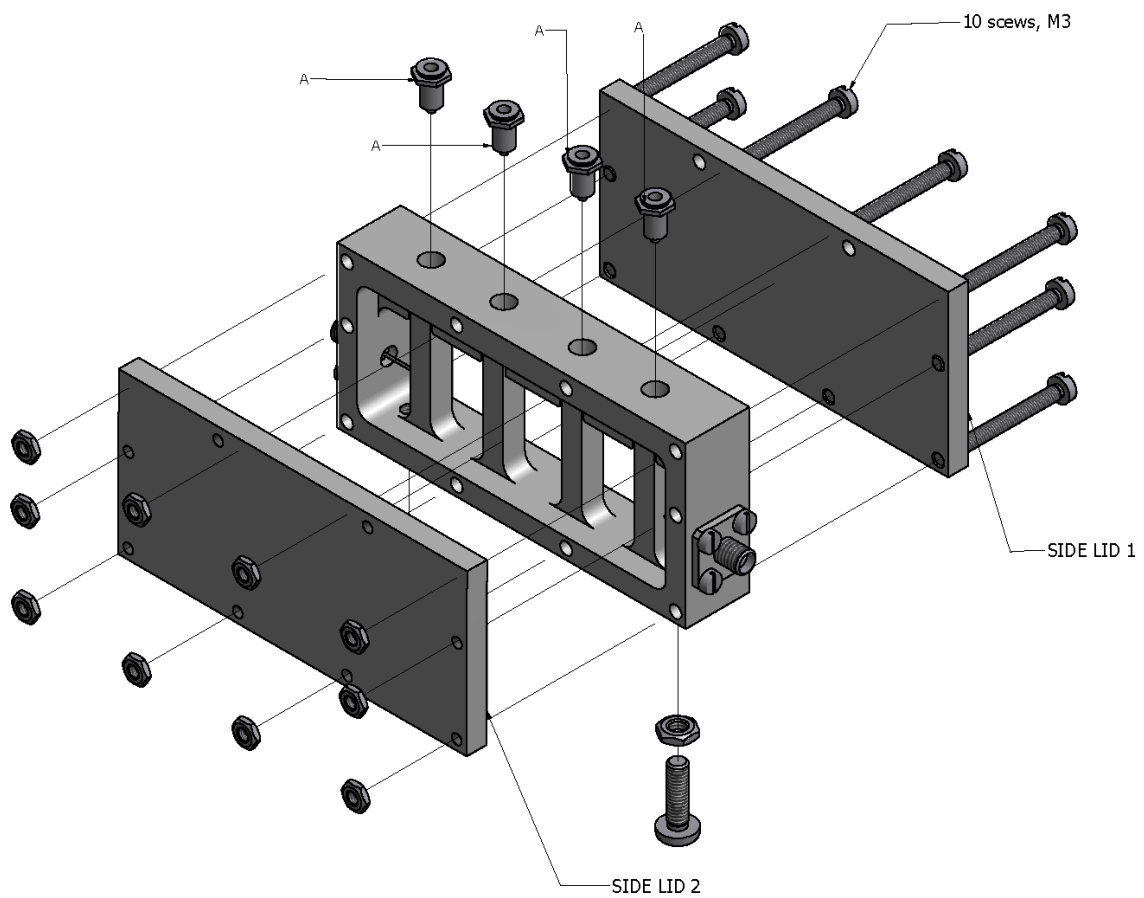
Exploded View of 1.3GHz Compline Filter - Wirecutting EDM Option
